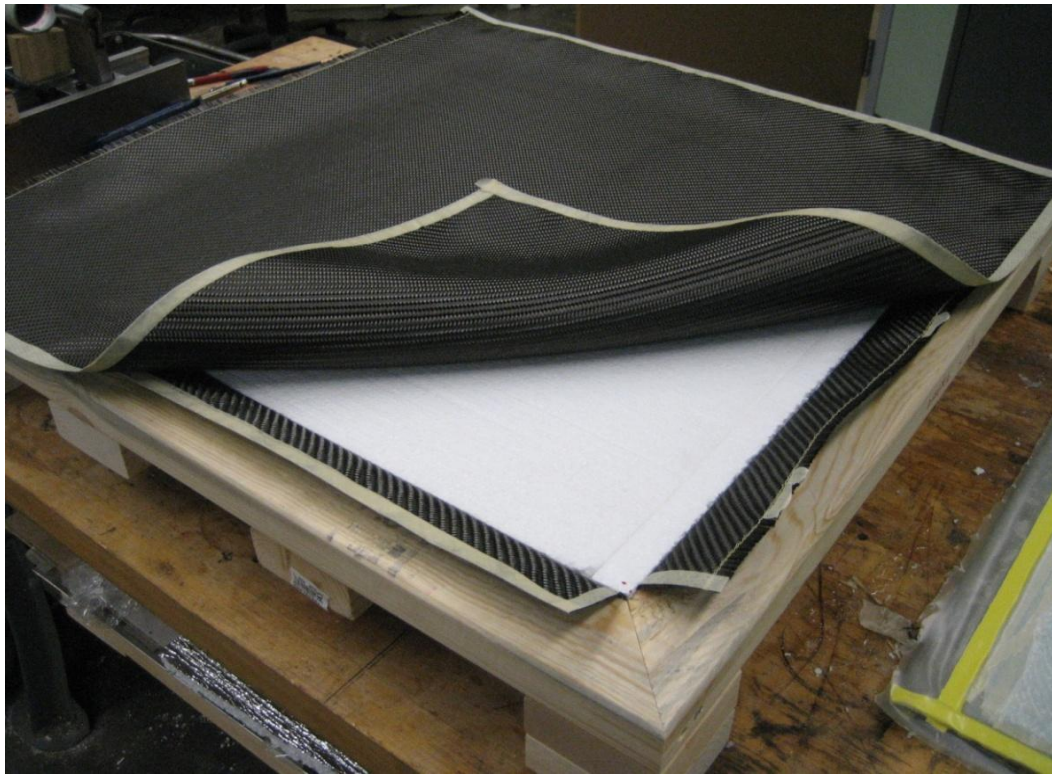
TCS panel fixture – showing the bottom carbon fibre sheet lay-up
